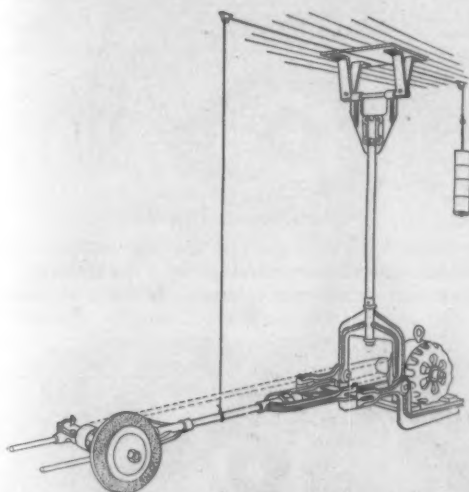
A Motor-Driven Swing Frame Emery Wheel Grinder Built by the Pittsburgh Emery Wheel Company, Pittsburgh, Pa.
